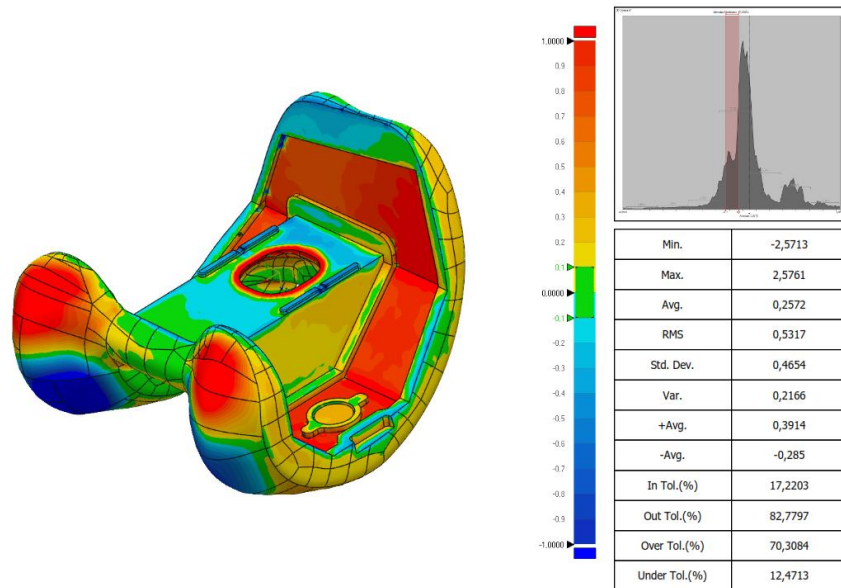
3D comparison of the TKR CAD design and the TKR after CNC machining.
